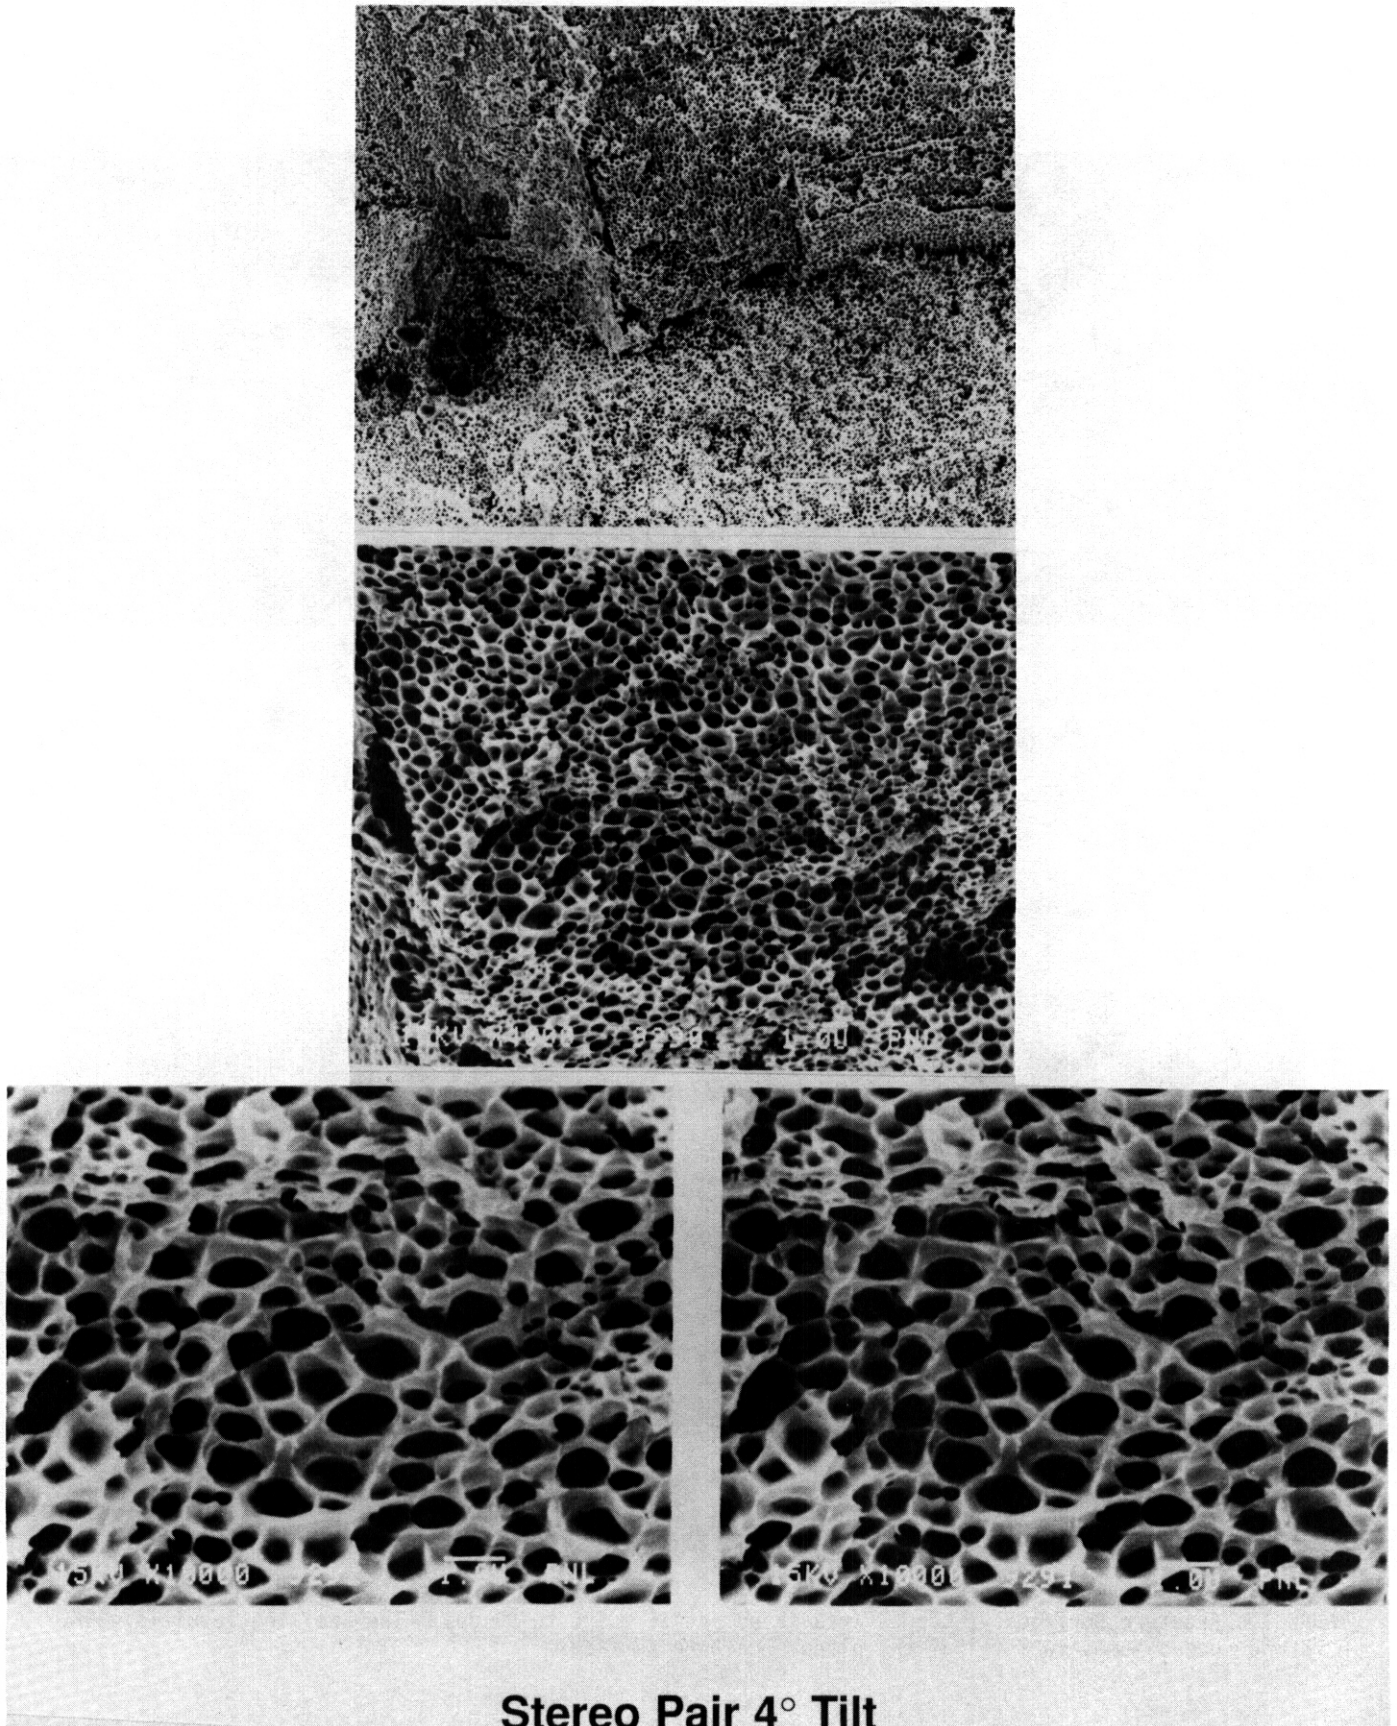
Higher Magnification Fractographs of 34 dpa Specimens
